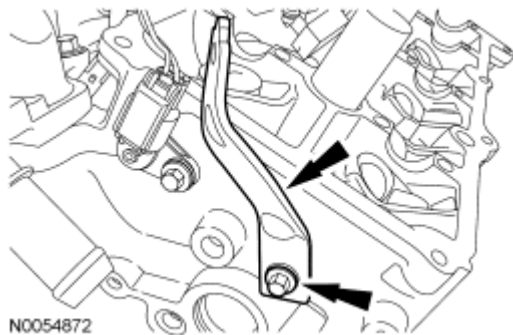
Locating Upper Intake Manifold Bracket & Bolt
